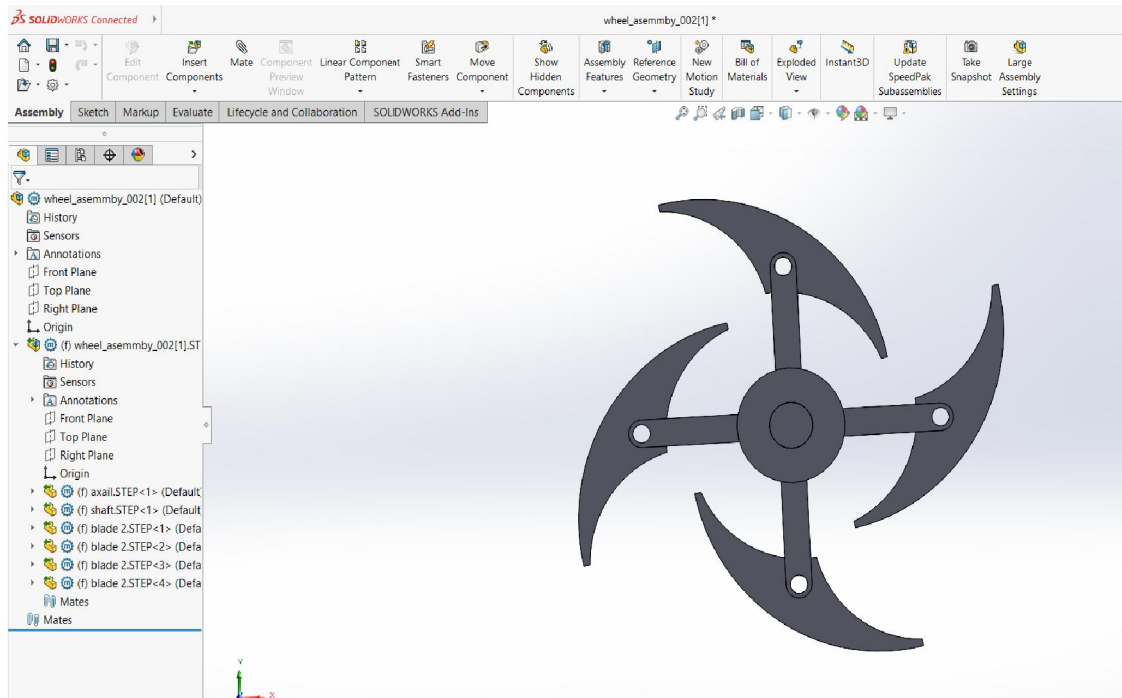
Wheel 2 position 2nd Assembly (wheel 2 case 2)
